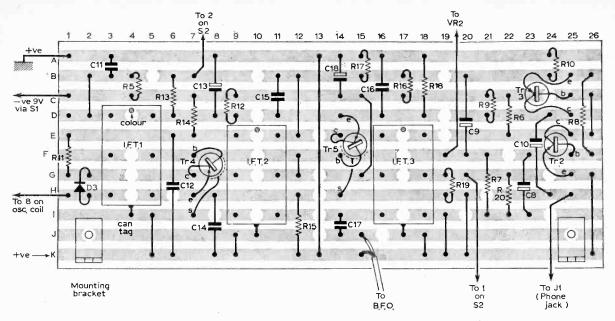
Layout and wiring of the complete i.f./a.f. panel.
